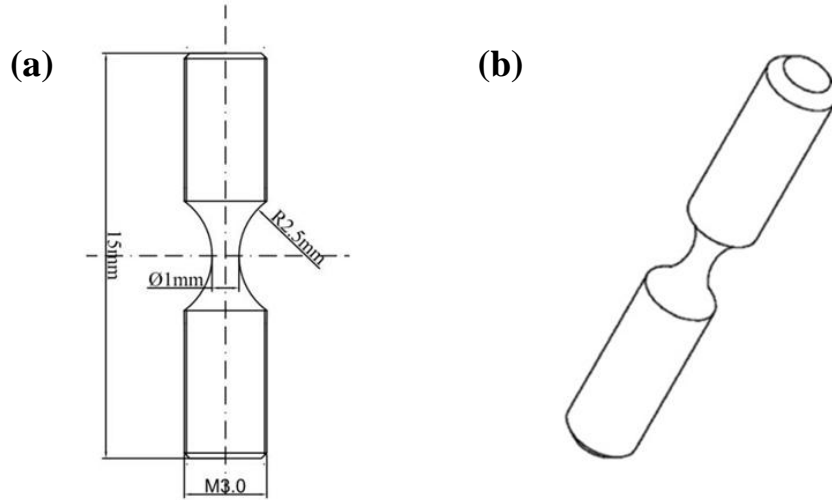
Geometry of sample for in-situ tensile test in (a) and 3D view of the sample in (b) [12].
